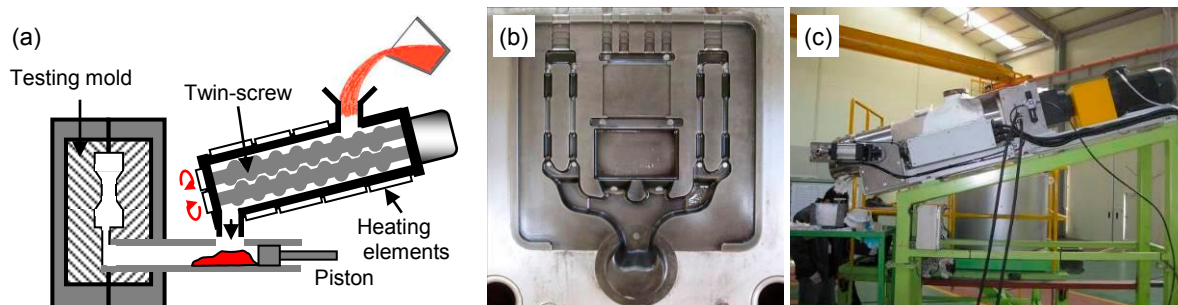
(a) Schematic drawing of the melt-shearing process, (b) mold configuration of test specimen, and (c) melt-shearing assembly attached to the die casting machine.
